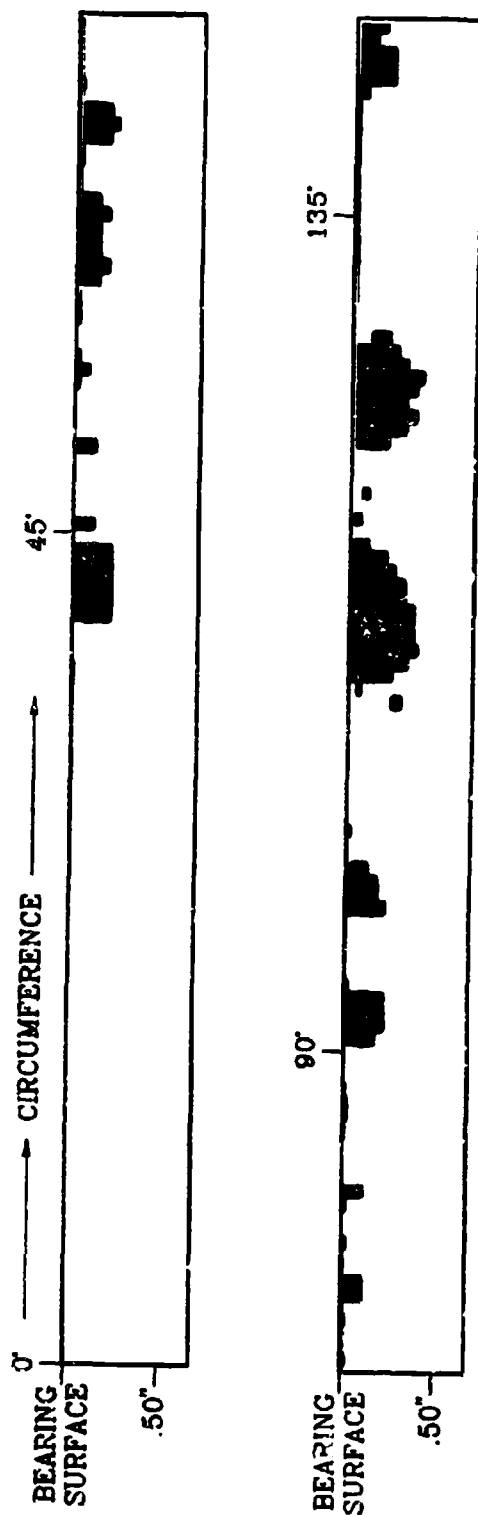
Pulse-echo C-scan of cylinder GJ1, Sheet 1.
